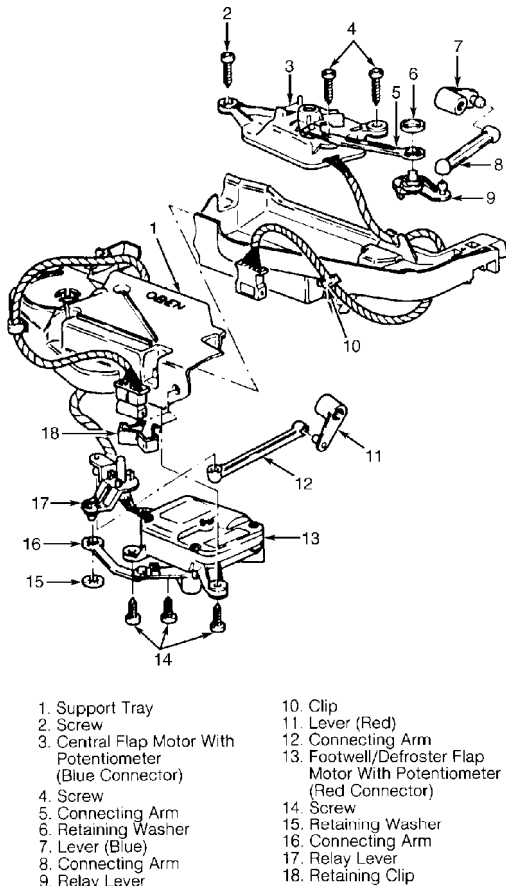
Removing Footwell/Defroster & Central Flap Motors
